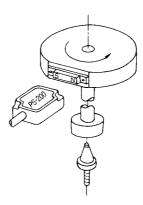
Magneto and Magnetic Sensor Mounting Direction
